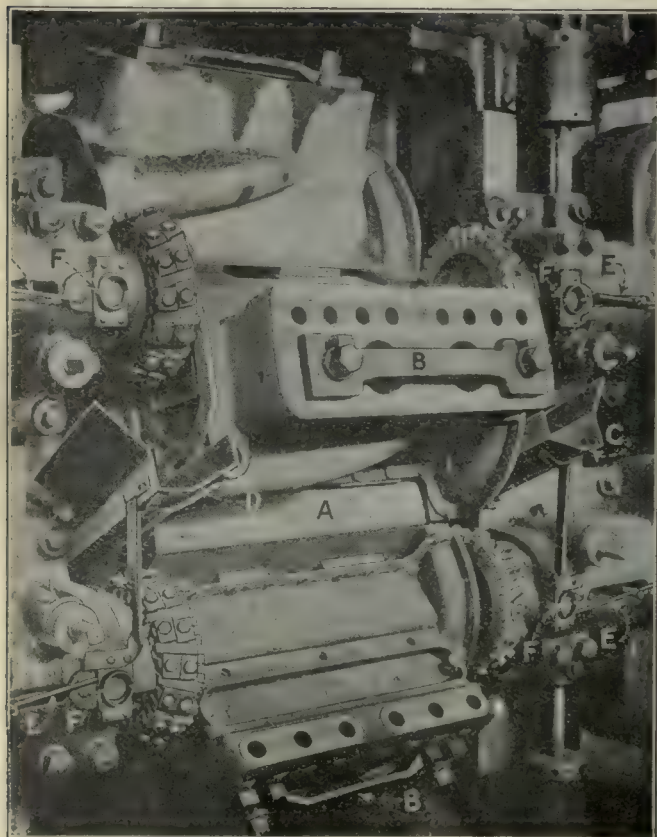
MILLING BOTH ENDS ON CONTINUOUS MILLING MACHINE
